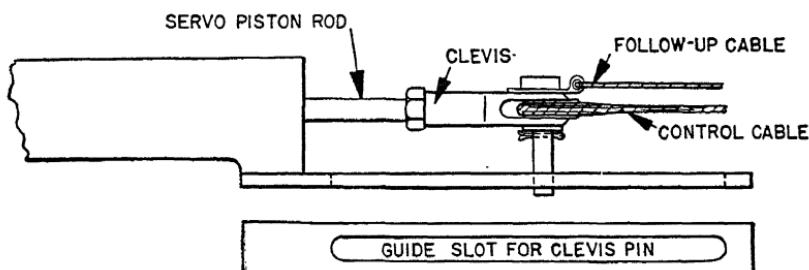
Suggested Method of Attaching Control and Follow-up Cables to Servo Piston Rods to Prevent Twisting
